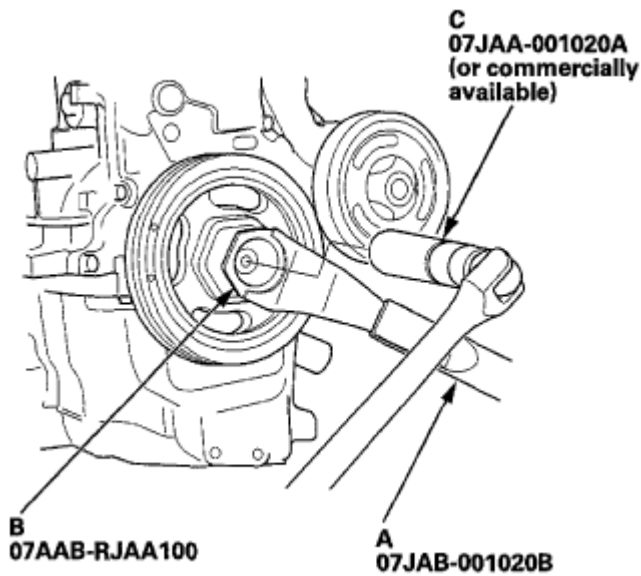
Holding Pulley With Holder Handle And Crankshaft Pulley Holder
